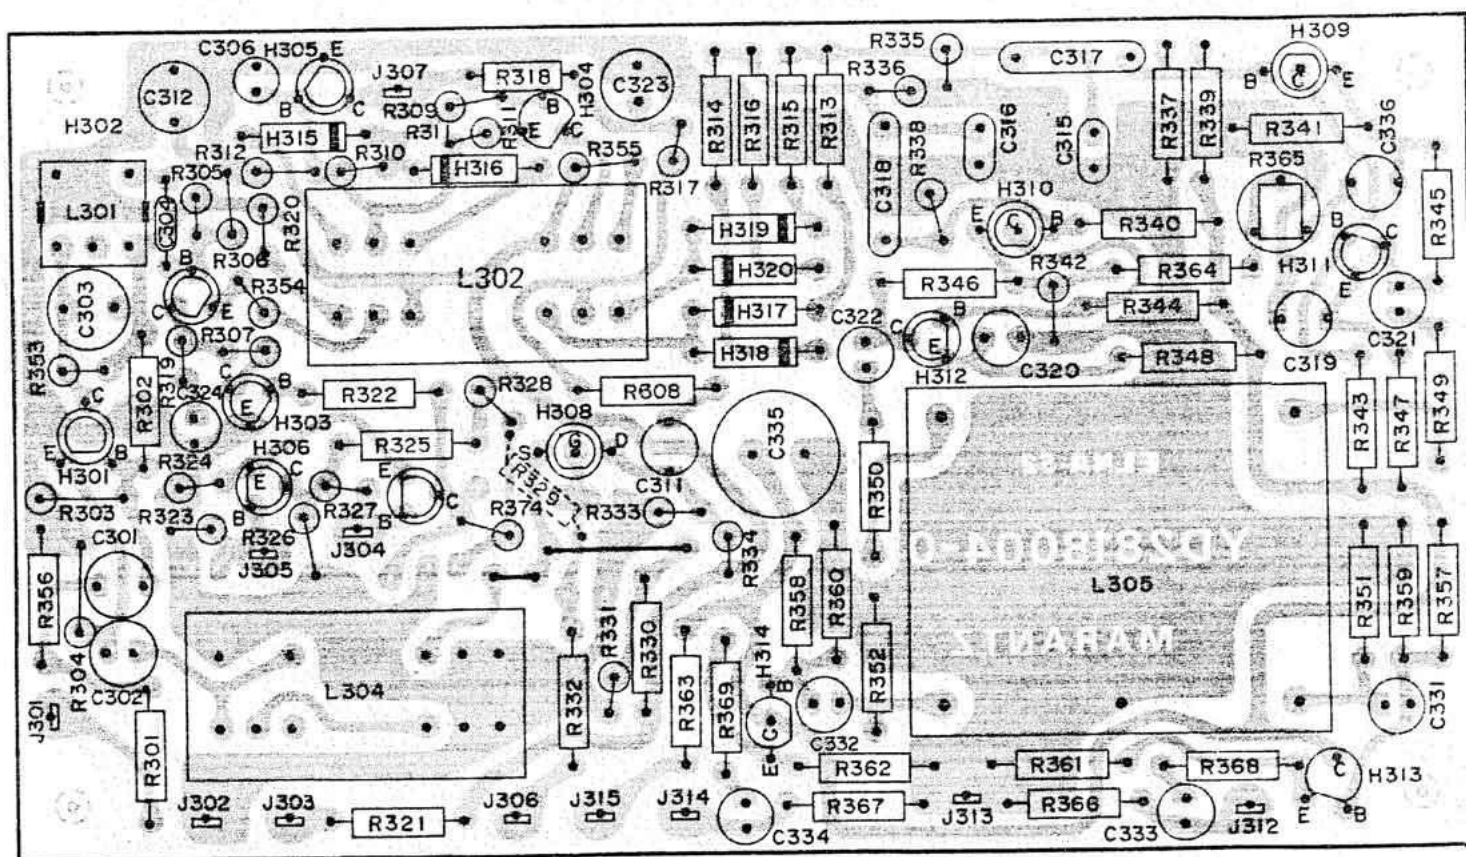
MPX Stereo Decoding Amplifier Assembly P300 Component Locations
